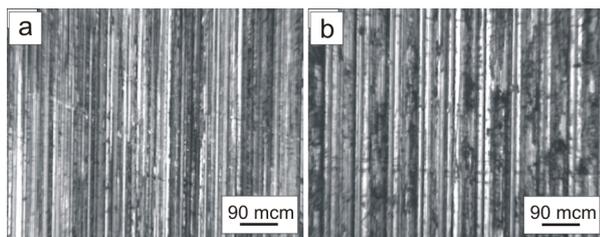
Machined surfaces (R_a 1.6): a – cylindrical grinding ; b – turning
